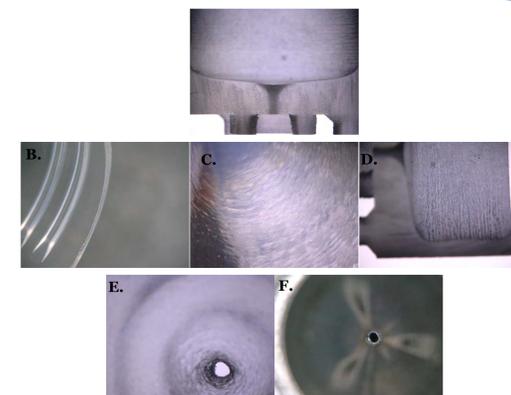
Images of 3D Printed Insert Under a Microscope: A) Image of the pellet well B) Falcon tube surface C) 3D printed insert, glossy finish D) 3D printed surface, matte finish E) Pellet well top view, matte finish F) Pellet well top view, glossy finish
